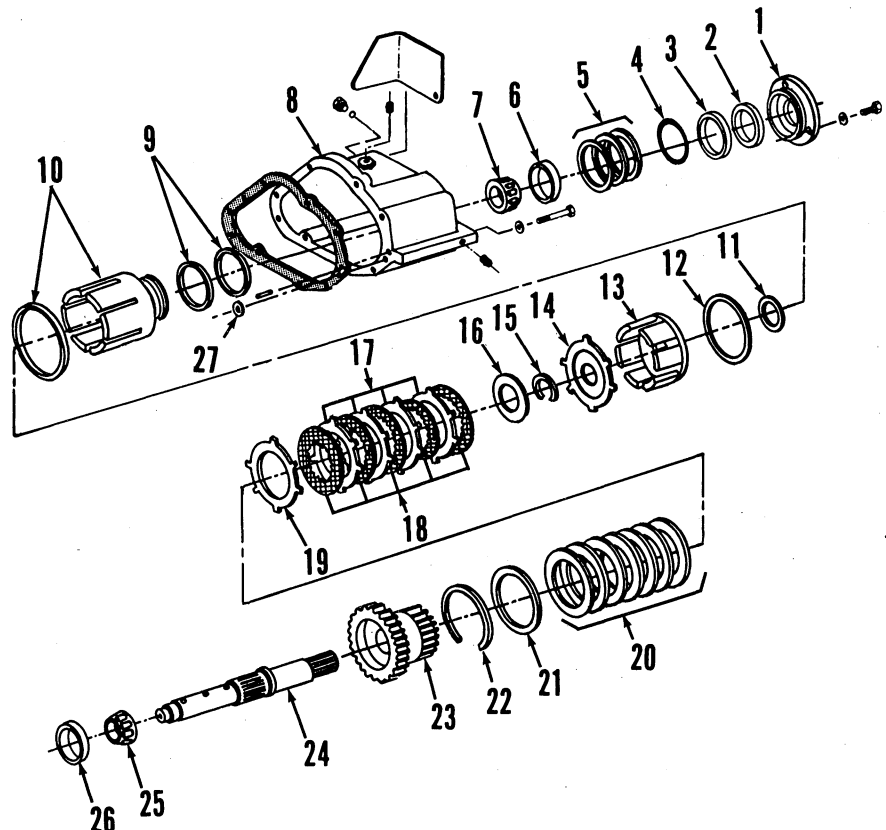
Exploded view of mechanical front-wheel drive clutch assembly used on tractors equipped with Power Shift transmission.
